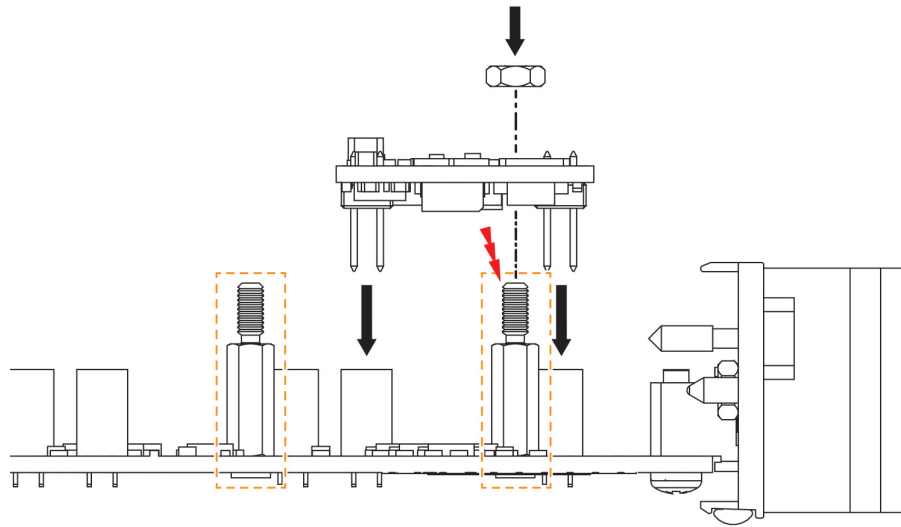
Side View of the Assembly of a PB5385RES.1-A Resistor Cascade Piggyback
